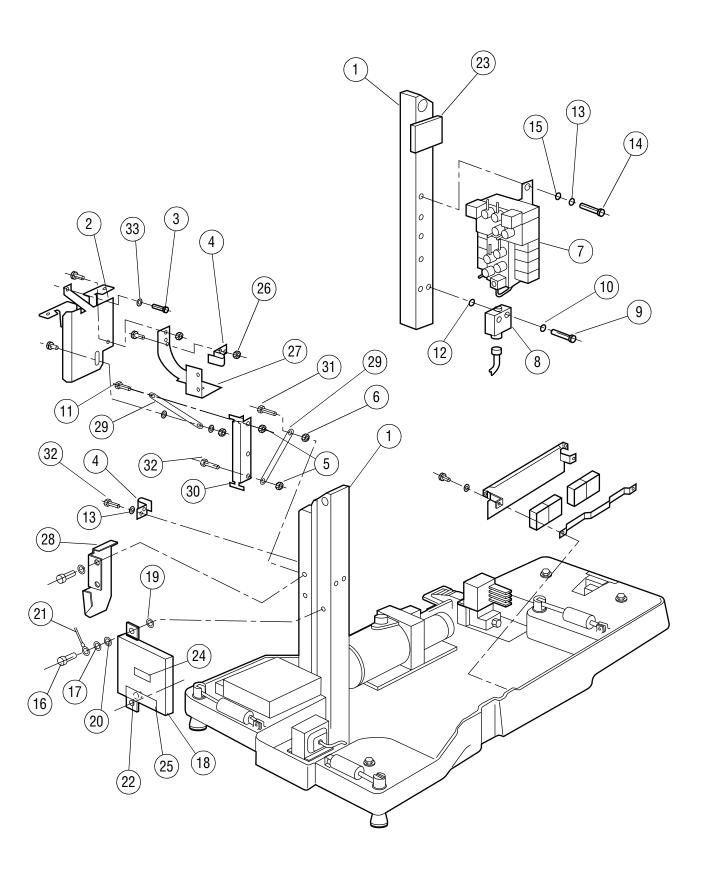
3085 SP (IPX4) Surgical Table Base Assembly, Column Mounted Parts
